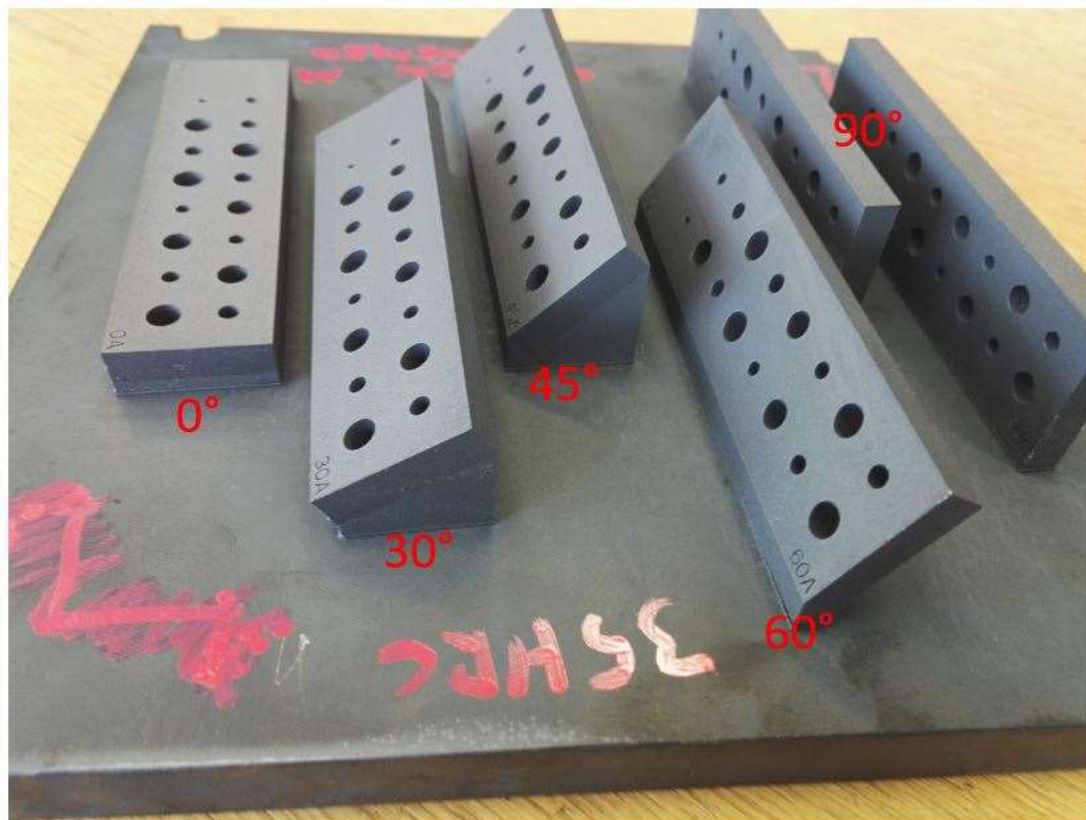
Maraging steel, solution treated, parts placed 5° to recoater
